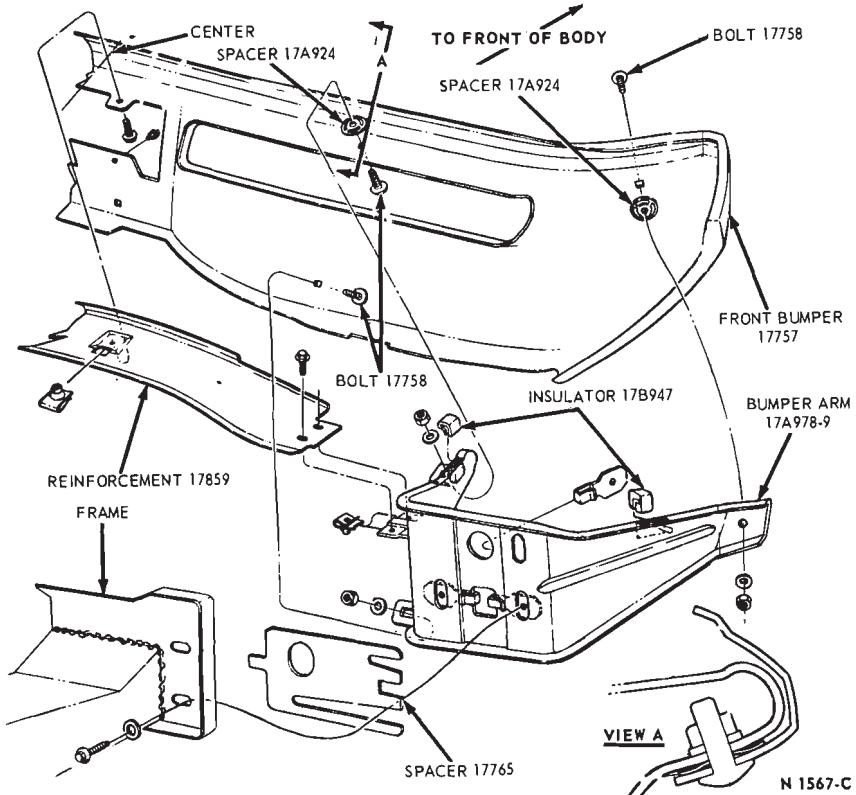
Front Bumper Installation—Mercury (Low Series)
